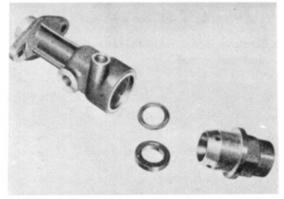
Taking out Piston Cup & Piston Cup Spacer 9. Remove union bolt, union, and gaskets.
